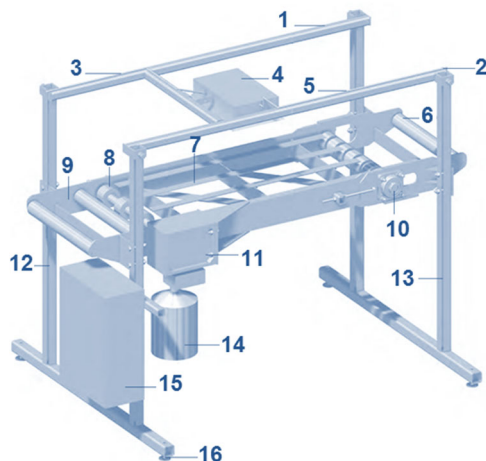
Pyrolysis machine: (1) Energy source carrier, (2) Propane connection, (3) CO<sub>2</sub> line, (4) Gas burner, (5) Propane gas line, (6) Pick-up reel, (7) Slide rails, (8) Drive gear, (9) Conveyor belt frame, (10) Conveyor belt tensioner, (11) Drive gear, (12) Nitrogen connection, (13) Base frame, (14) Motor, (15) Control cabinet, (16) Rotary feet.
